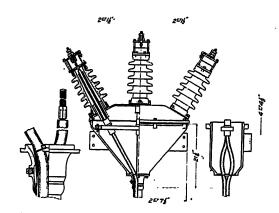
Drawing Showing Construction of 37,000-Volt, Three-Conductor Oil-Filled Terminal for Lead-Covered Cable
